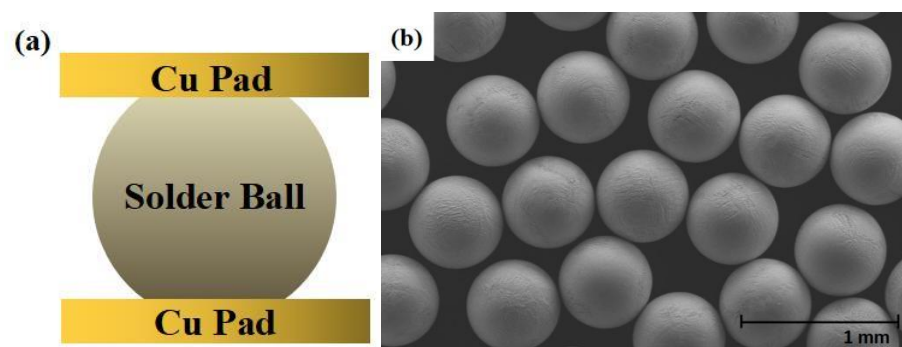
(a) Schematic diagram of the solder joint and (b) SEM photo of solder balls.
